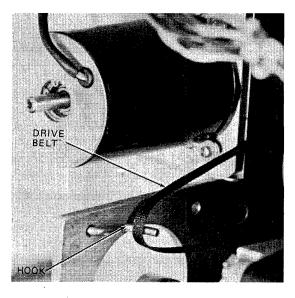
RIGHT DRIVE BELT REMOVAL
